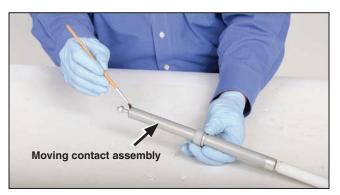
Apply lubricant to the trigger end of the moving contact assembly.
